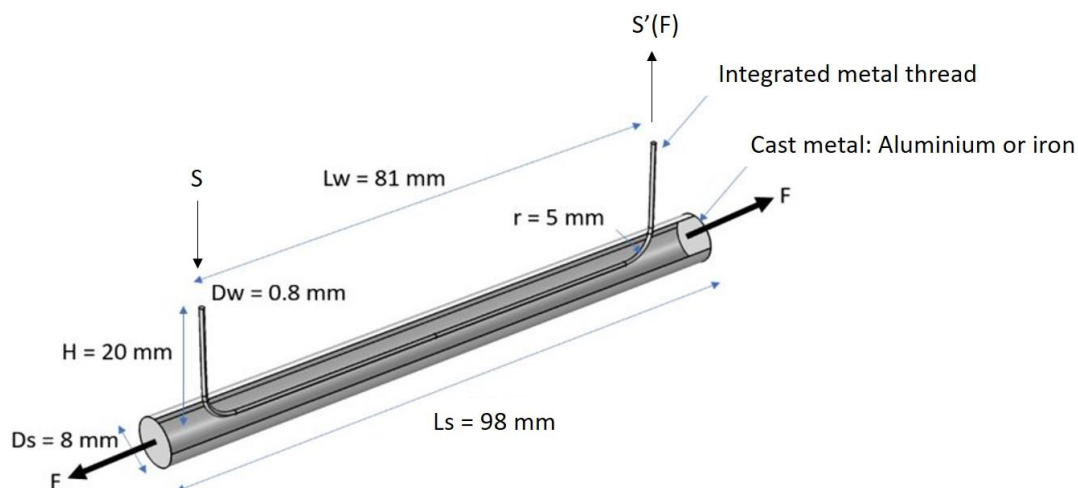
Schematic picture of the integrated metal thread in the aluminium or iron cast metal. The dimensions of the circular part of the prototype and the metal thread are also shown in the figure. The prototypes were
